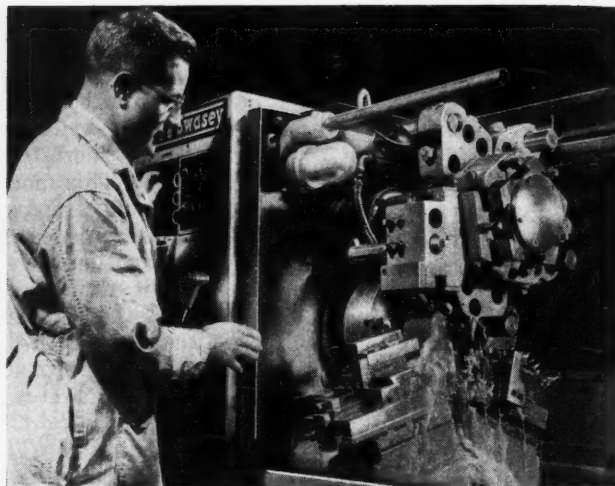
Warner & Swasey single-spindle automatic provided with new threading equipment
